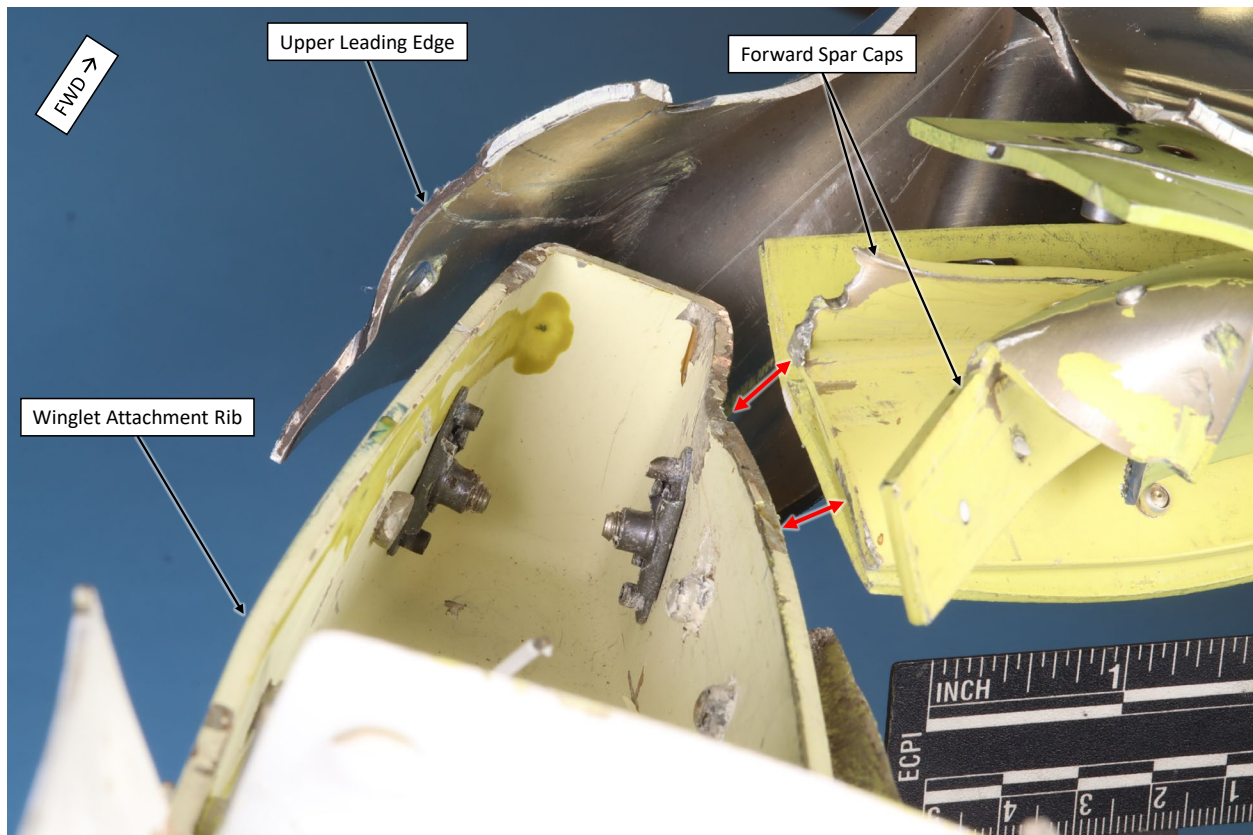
Photograph of the winglet attachment rib aligned with the outboard contact mark on the inner upper surface of the leading edge. Contact marks and deformation observed on the lower inboard edge of the attachment rib corresponded with contact marks observed on the outboard end of the lower forward spar cap as indicated by red arrows. Note the outboard section of the deformed forward spar has been removed for clarity.
